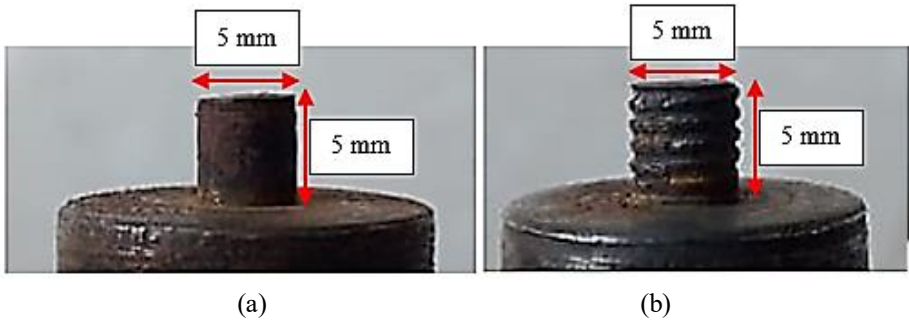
Design and profile of a). Cylindrical tool pin, b). Threaded tool pin
